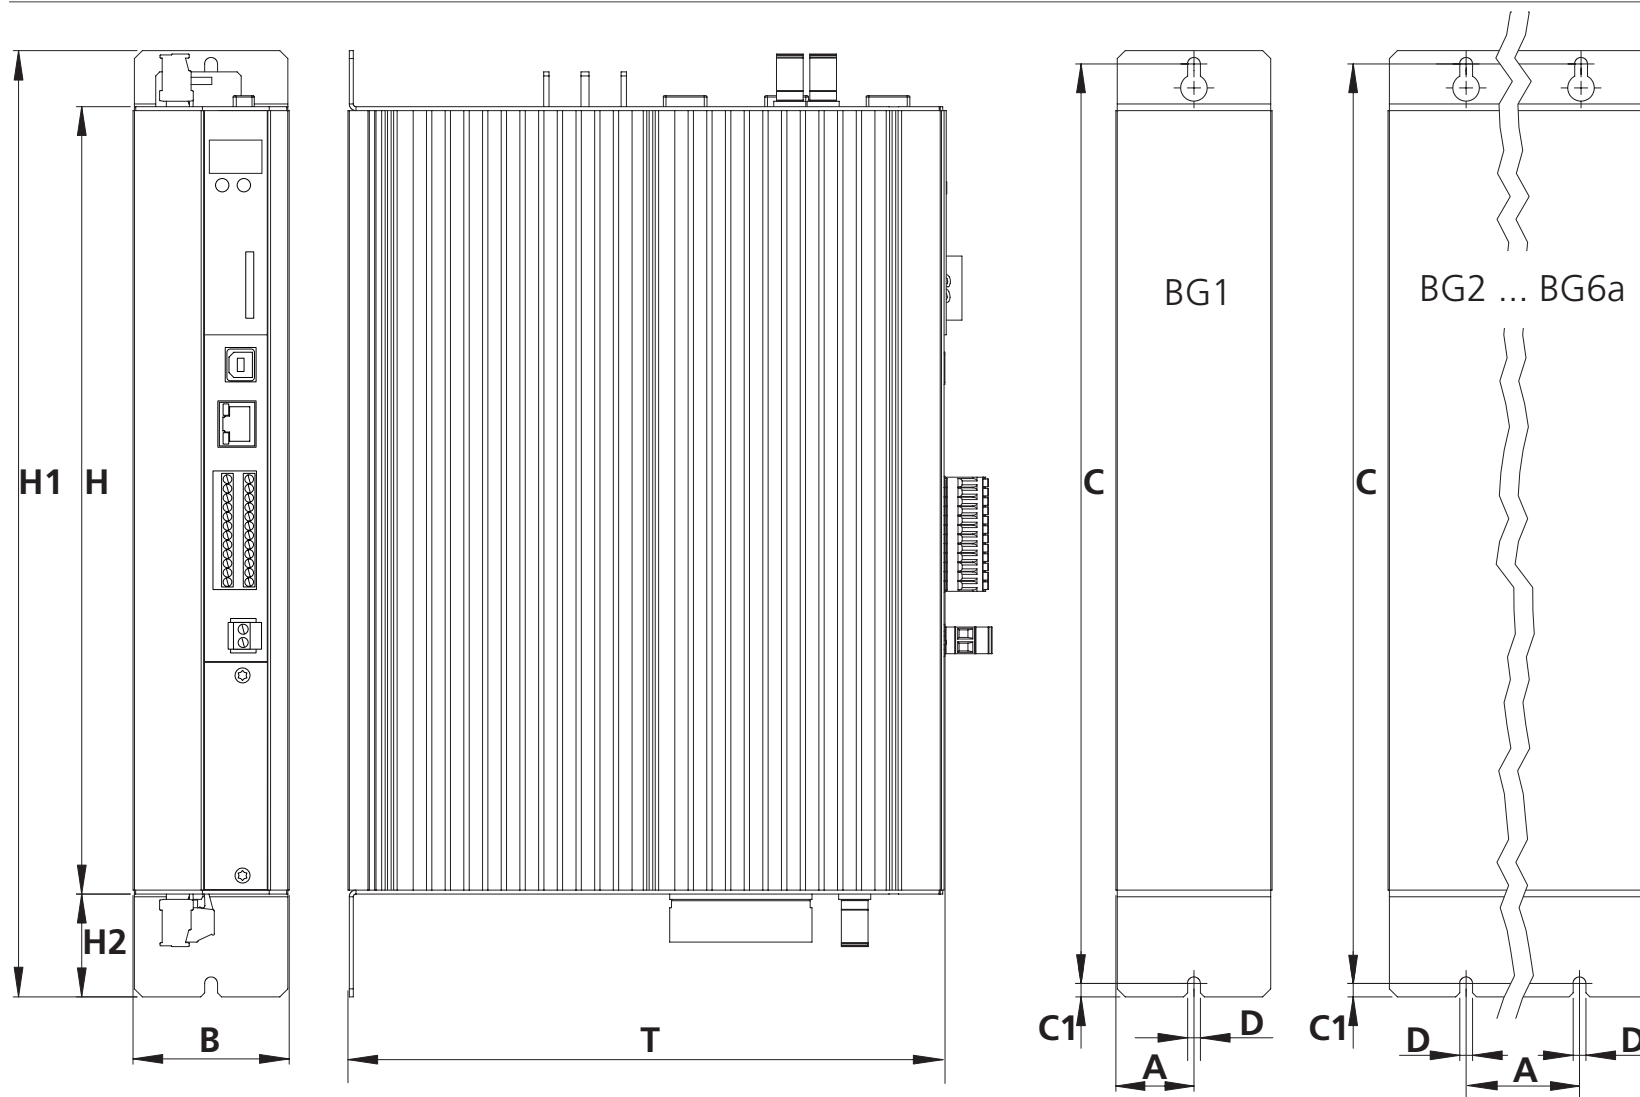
Dimensional drawing of housing with air cooling, schematic representation for BG1 to BG6a
